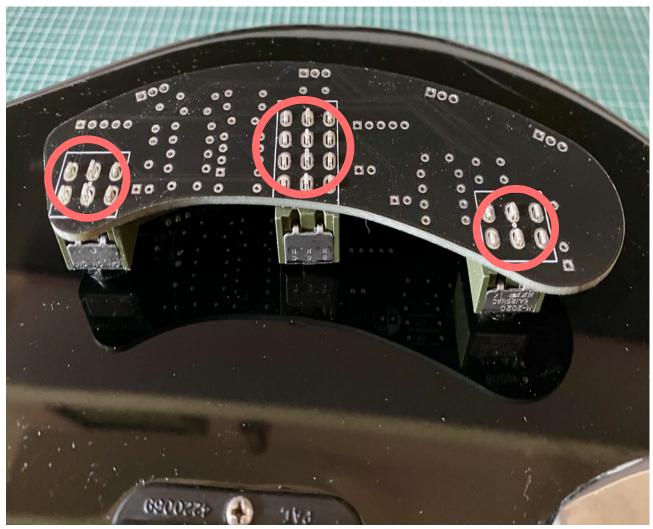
arrange PCB on toggle switch pin, make sure the toggle switch pins align with corresponding PCB cutouts.
